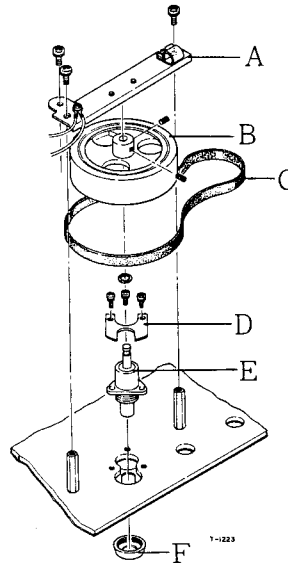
Flywheel and Capstan Ass'y Removal
